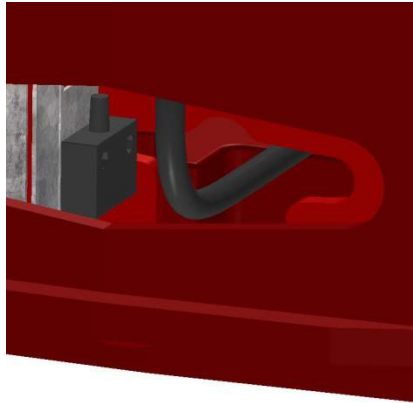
Inner bottom view. Pneumatic hose passing through the bollard head
